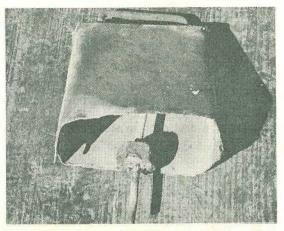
A heavy nut makes a good hammer. The hammer is in the correct position when its bottom edge is 2 to 3 mm below the bottom edge of the bell.
